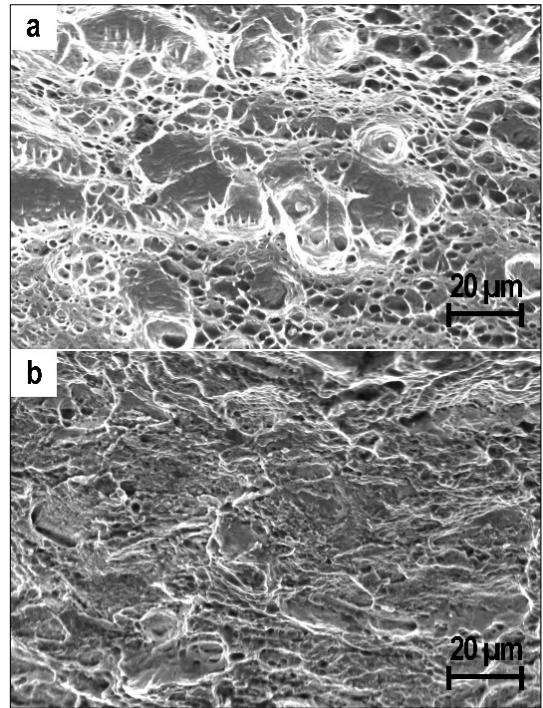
Scanning electron microscopic image of fracture surfaces after Charpy impact test, additively manufactured (a), conventionally manufactured specimen (b)
